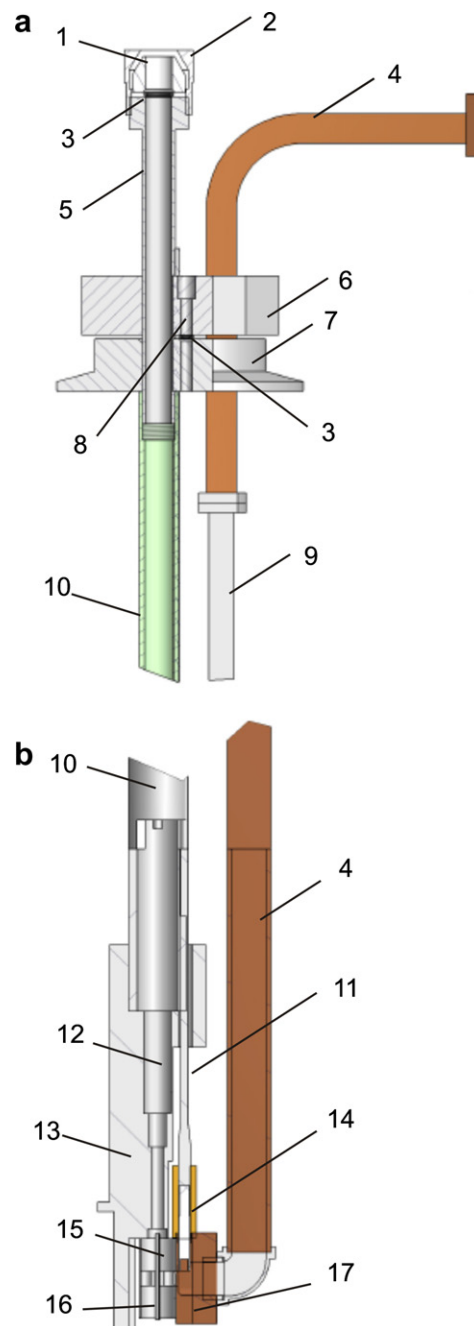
(a) Upper and (b) lower cross-section part of the cryogenic probe head. (1) Teflon plunger, (2) cover nut, (3) O-ring, (4) WR28 Cu wave guide, (5) stainless steel (st. st.) sample access tube extension, (6) Al-flange, (7) st. st. flange, (8) vacuum feed through, (9) WR28 st. st. wave guide, (10) epoxy sample access tube, (11) st. st. rod for remote tuning control, (12) sample clamp E600-1022/9 (Bruker), (13) PEEK intersection, (14) PEEK tuning rod, (15) sample tube, (16) interchangeable LGR, and (17) Cu iris-coupler plate.
